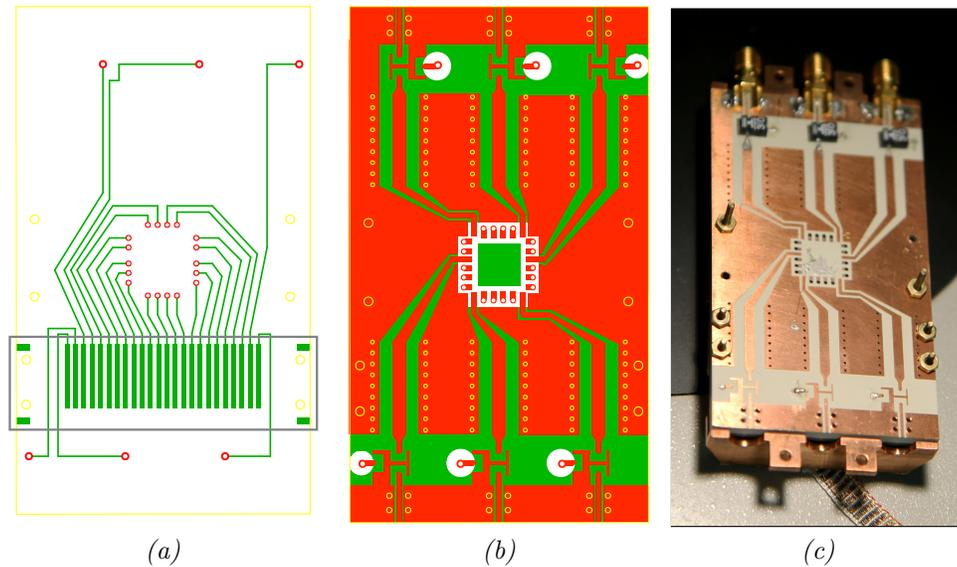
The PCB assembly is made of two PCBs secured together back-to-back and connected through matching vertical interconnect accesses: (a) a PCB designed for DC lines with a section, outlined in grey, to mate with the 24-line DC adapter, and (b) a PCB for RF signals and device mounting. These images are the PCB design patterns; devices are mounted in the green square in the centre of (b). (c) A photograph of the assembled PCBs in the back half of the device shield. SMA end-launch connectors (gold) and surface-mount bias tees (black) used in RF experiments are visible towards the top of the PCB. The RF PCB can support as many as six high frequency connections using co-planar striplines designed for 50Ω impedance.
